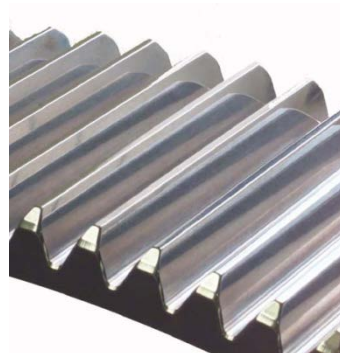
Sikorsky S76 third stage bull gear close-up post ISF
